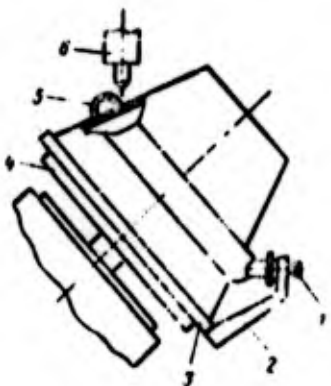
Welding of collectors: 1 - index pin; 2 - bracket; 3 - casing of the device; 4 - faceplate of the manipulator; 5 - welded collector; 6 - welding head.
